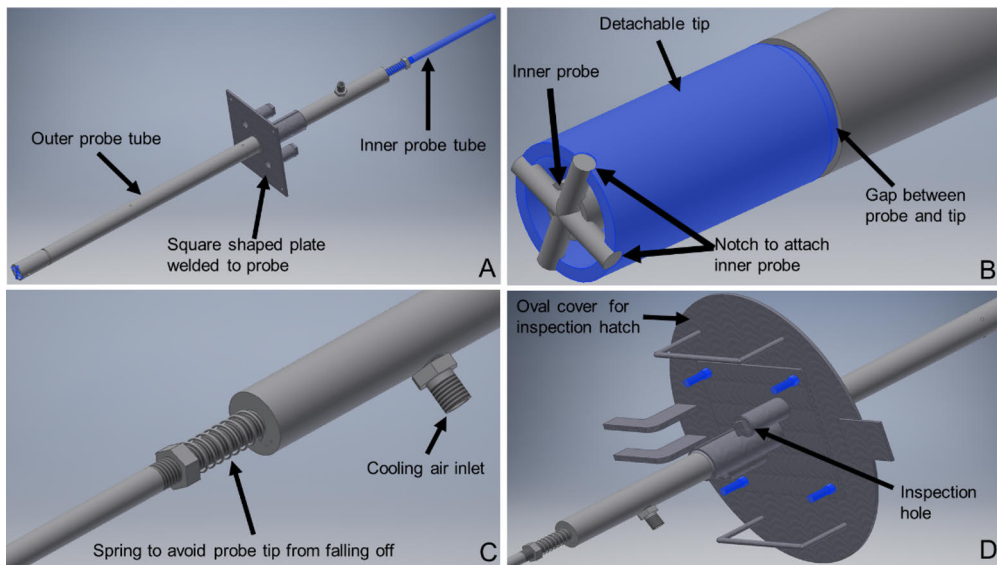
Main design features of full-scale deposit sampling probe: A) Fully assembled probe; B) Removable tip; C) Back end of probe; D) Custom made manhole cover; Reprinted with permission from Paper III under a CC-BY-4.0 license. Copyright © 2023 Elsevier
